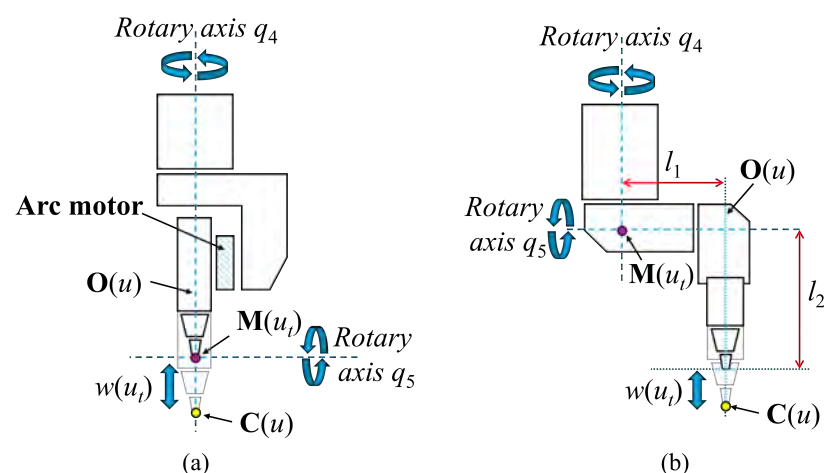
Mechanical structure of 3D laser cutting heads. (a) Zero-offset head on EFORT machine; (b) conventional head on traditional 3D laser cutting machines with offsets l_1 and l_2 .
